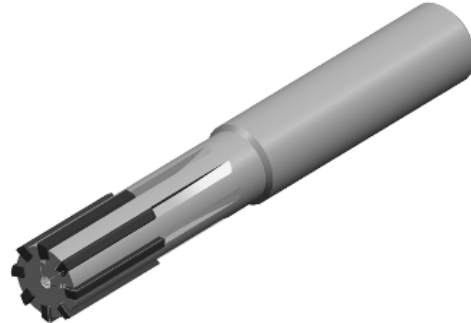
Guhring CFRP 8 edge PCD mill
